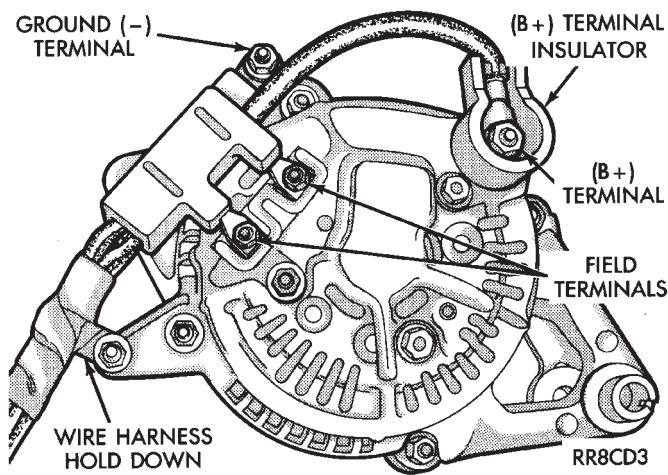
Remove or Install Wire Connector Assembly—Nippondenso Generator
